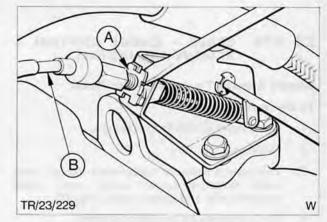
Removal of accelerator cable retaining clip A – Cable retaining clip
